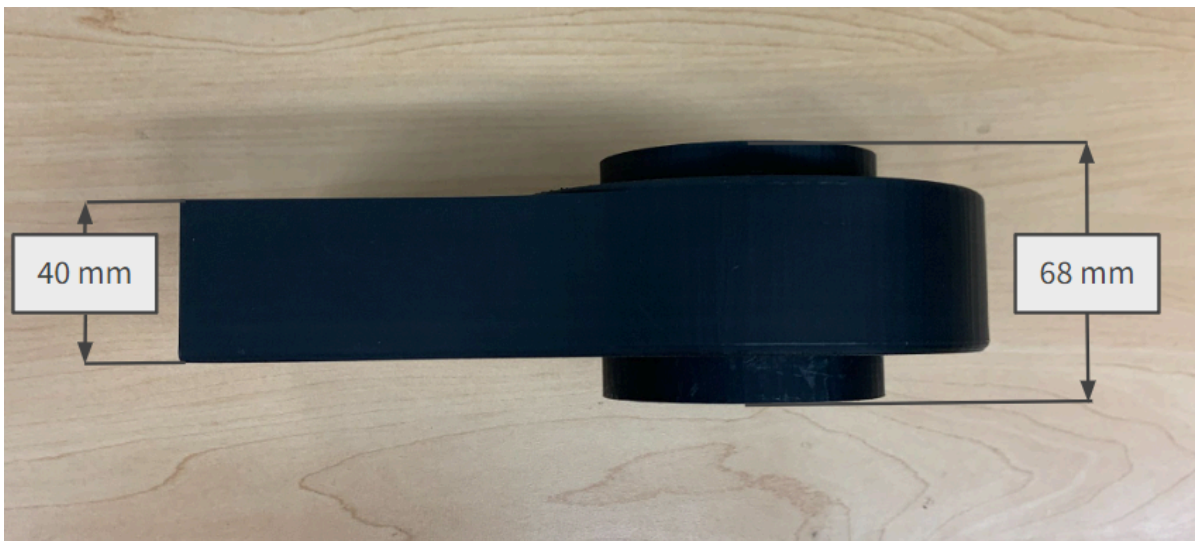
Profile view of sensor attachment with important dimensions labeled.
